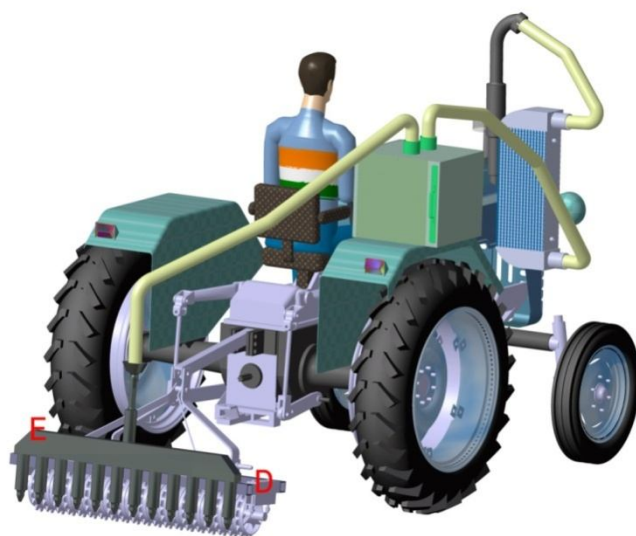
(D- Farming attachment for Tractor, E- Exhaust Injector/ Seeder)
